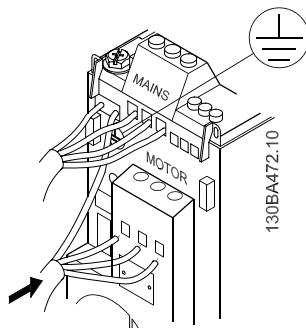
Mounting of Ground Cable, Mains, and Motor Wires
